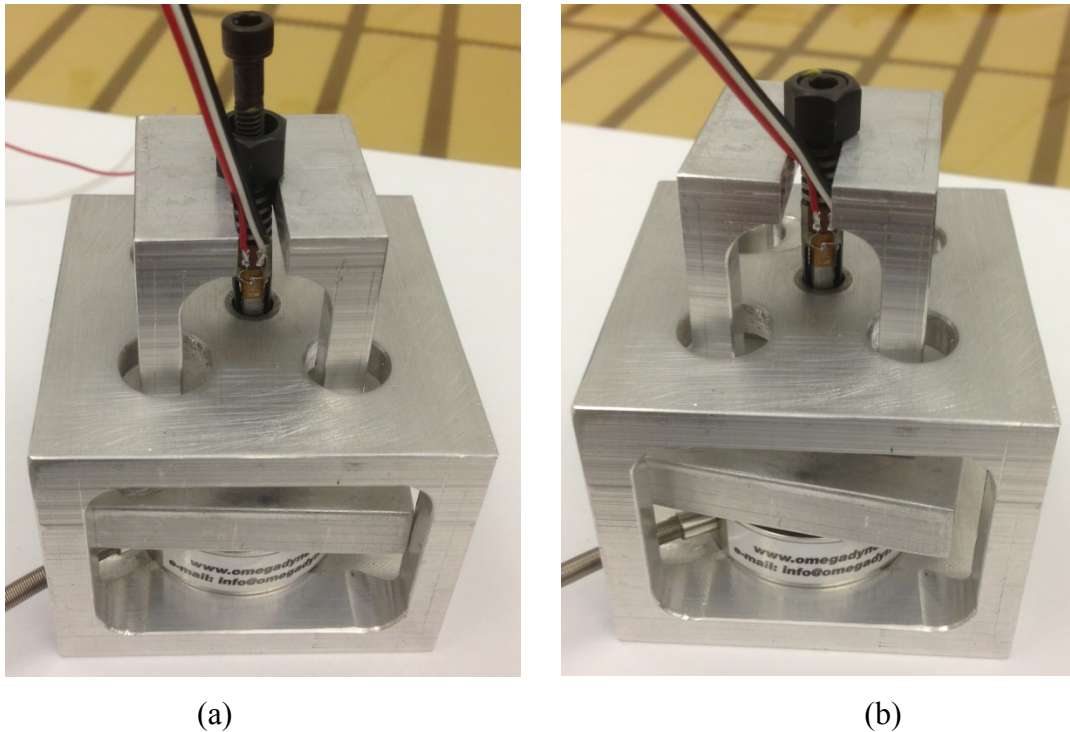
Bracket design for loading experiment of the temporary fastener with strain gage attached: (a) temporary fastener installed and (b) clamping force applied
